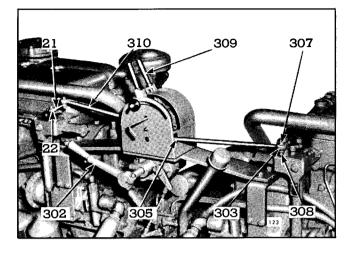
Throttle Control Mounting (Tandem Twin Unit)
